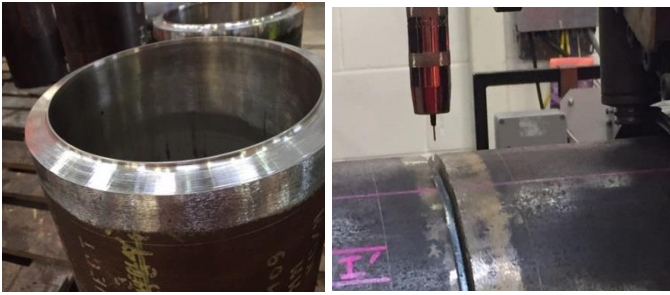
(a) Narrow gap welding in SubSea 7 Lab – Pipe edges cleaned showing and (b) Narrow gap weld in SubSea 7 Lab
